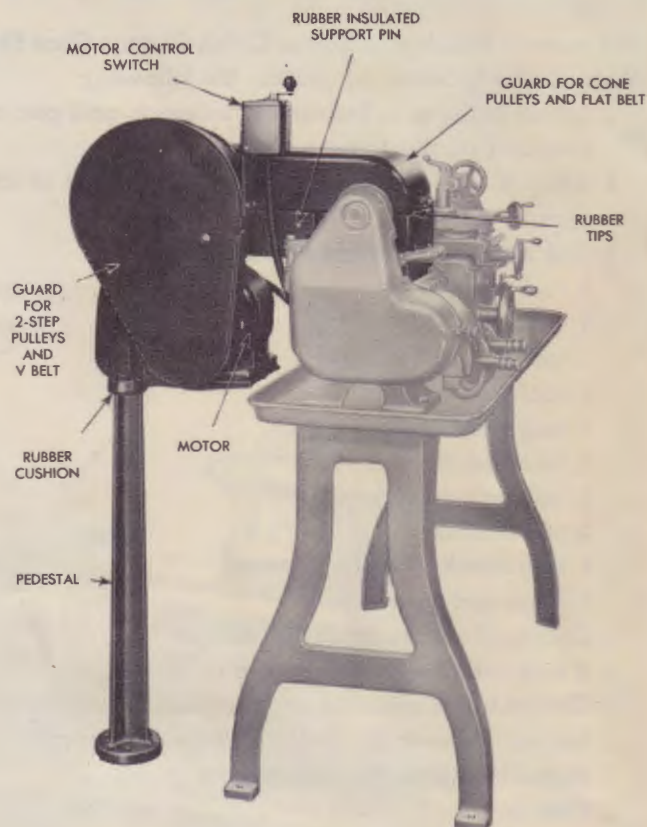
END VIEW OF COUNTERSHAFT ASSEMBLY
